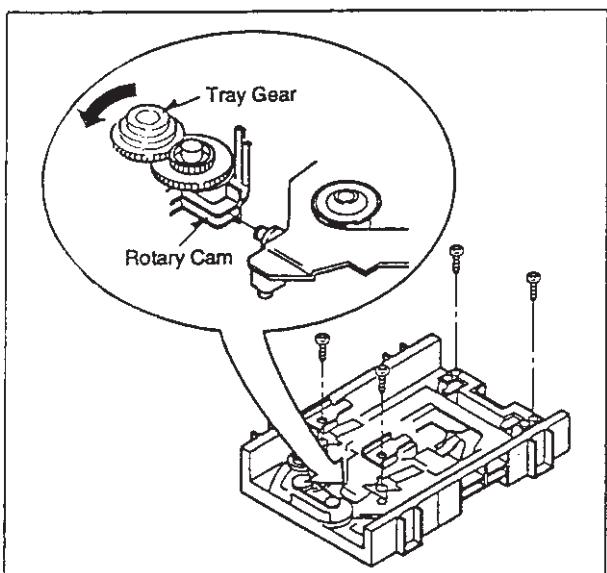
Setting of the Traverse Unit and the Rotary Cam
